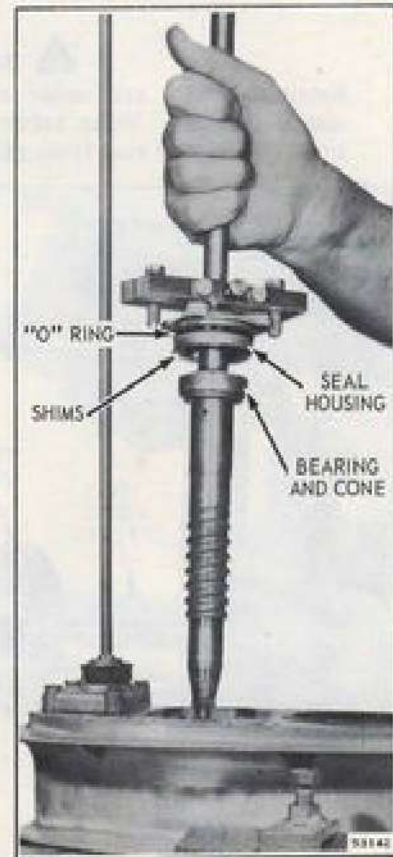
Driveshaft, Seal Housing, Shim(s) and Bearing
